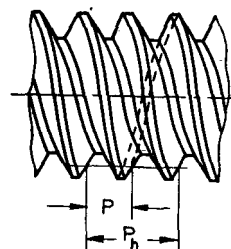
TWO-START THREAD WITH RIGHT-HAND EXTERNAL THREAD
